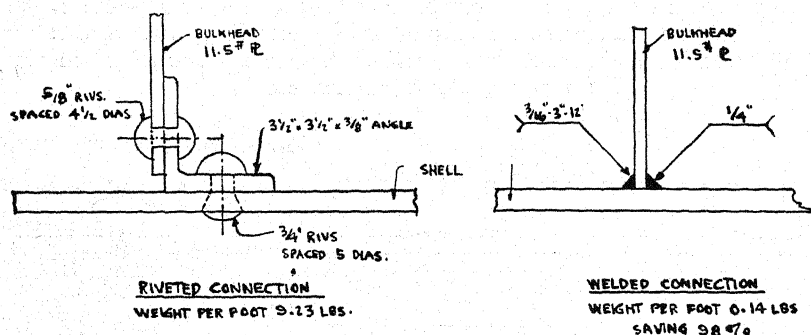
Comparative weight—riveted and welded connection of bulkhead to shell.
